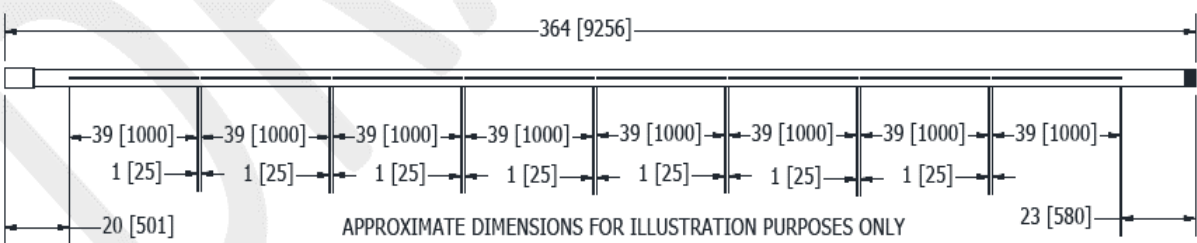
plasma cutting dimensions tubing lower part [13]
